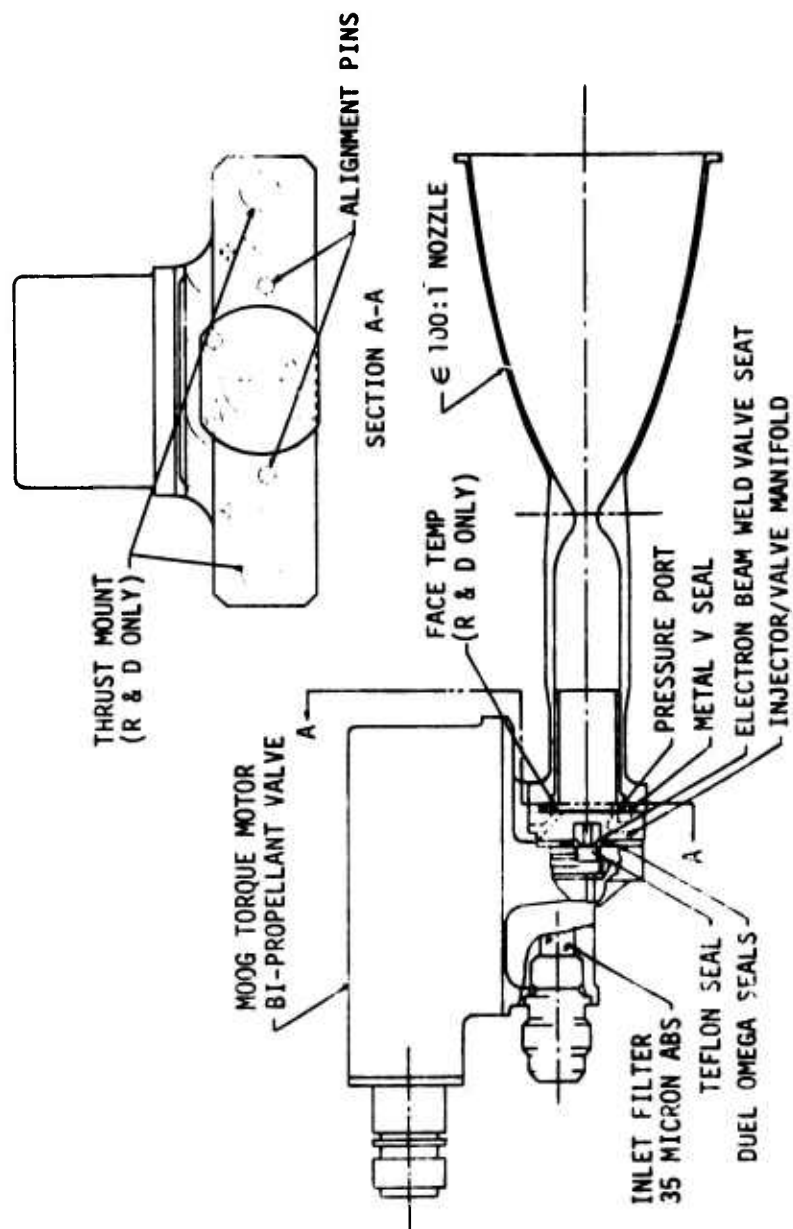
5 lb Thrust Bipropellant Engine Thrust Chamber Assembly
